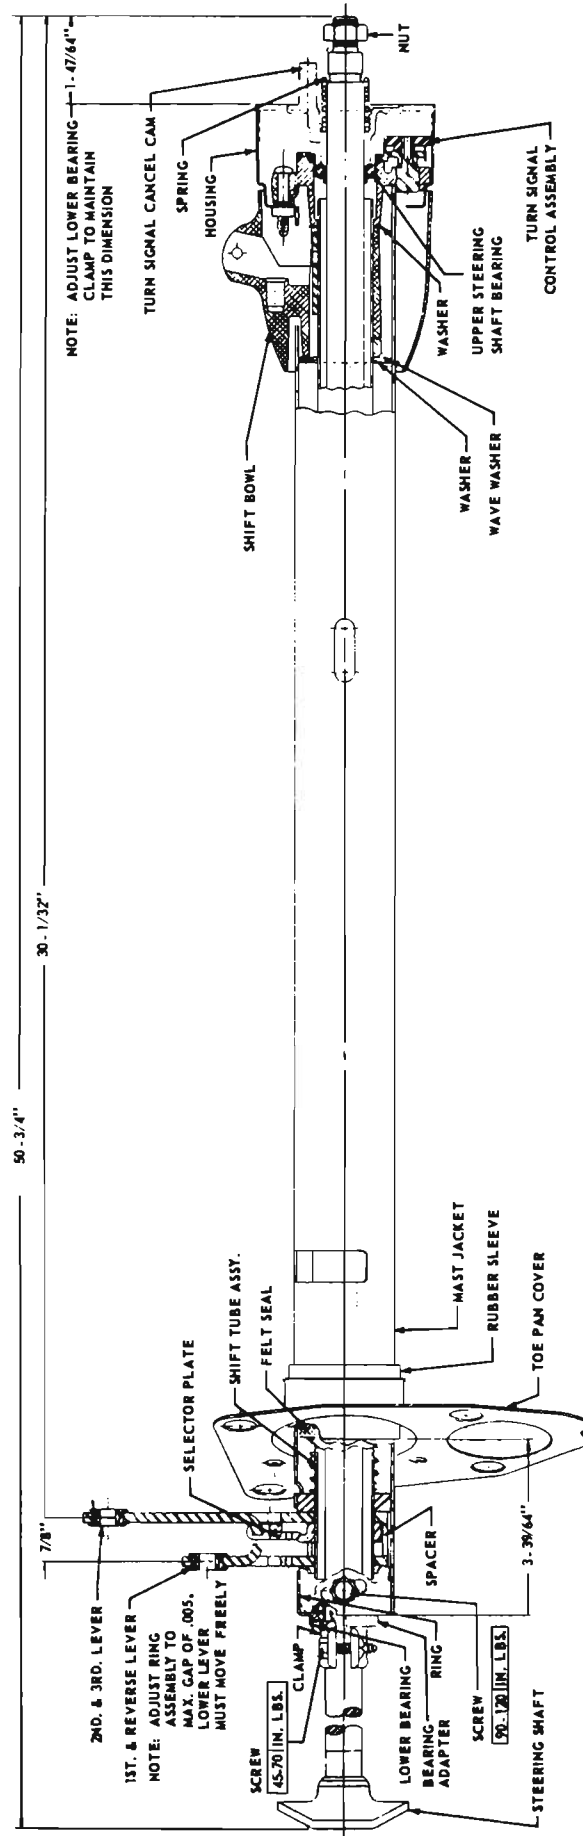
Mast Jacket and Transmission Control Shaft Assembly - Three Speed Synchromesh Transmission
